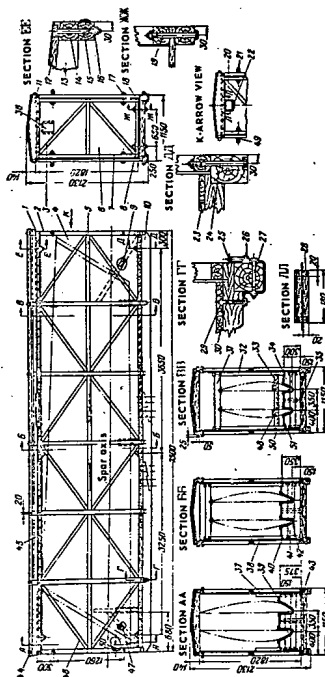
CONTAINER FOR PACKING FLAP OF SECOND DETACHABLE WING PART
